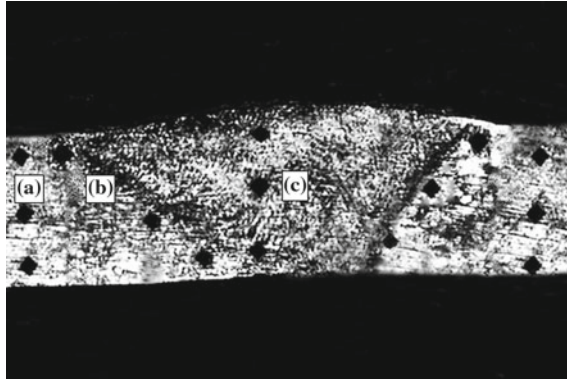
Hardness indentation mark: a Fusion weld b HAZ zone 316L c base zone
